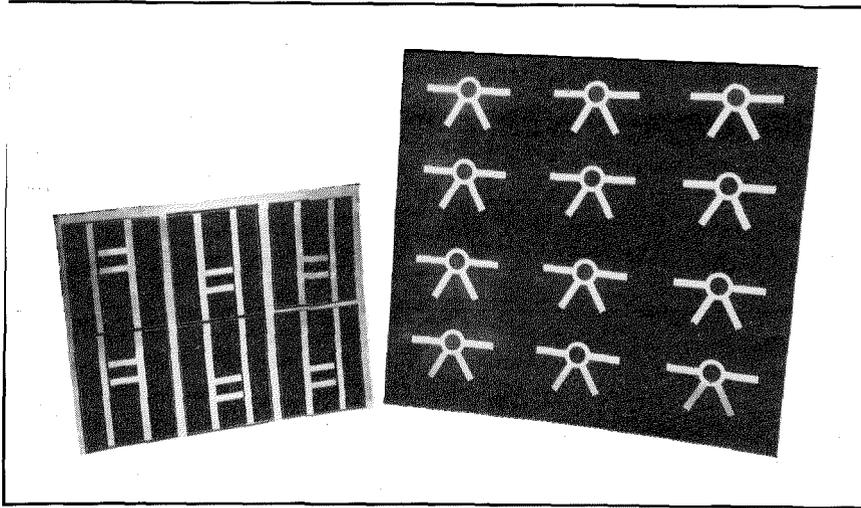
Method of producing printed strip-line components. The larger sheet is about 15 inches (38 centimeters) wide.
